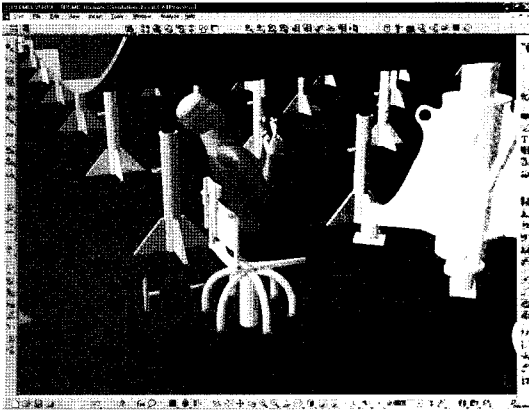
Model of Upward Welding in a Sitting Position.
